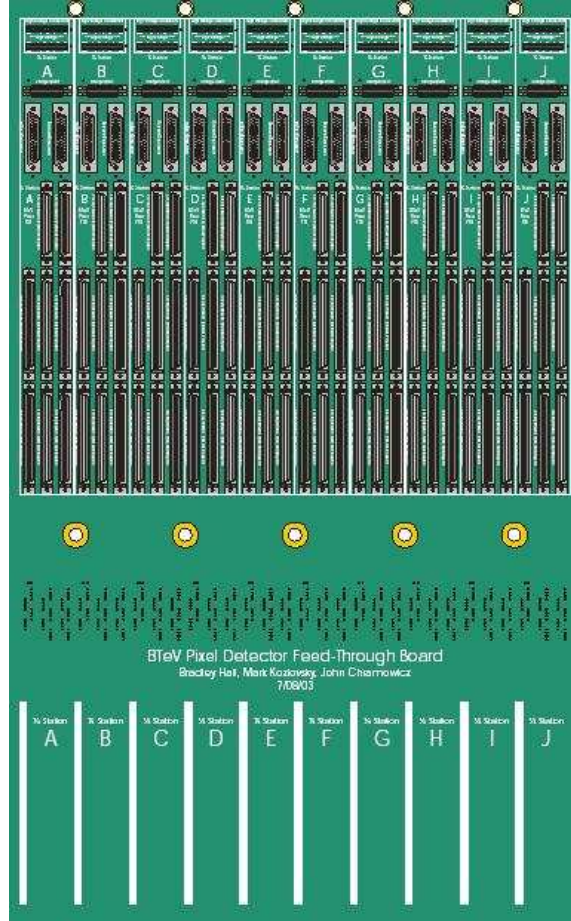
Front view of the Feed-through Board now being layout and reviewed.
